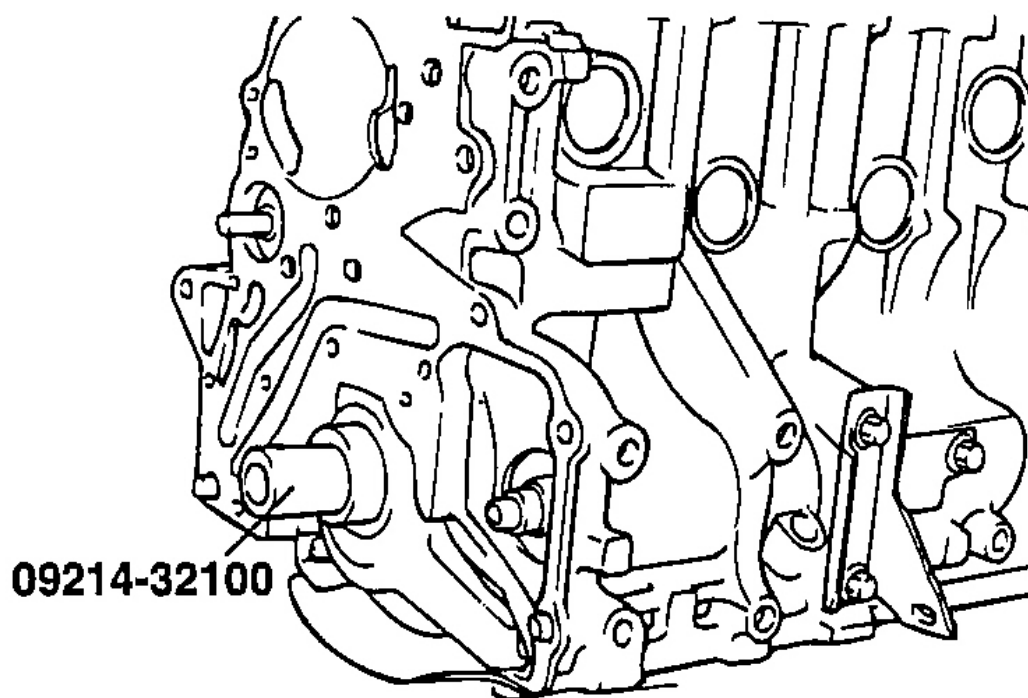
Identifying Crankshaft Front Oil Seal Installer (09214-32000)
